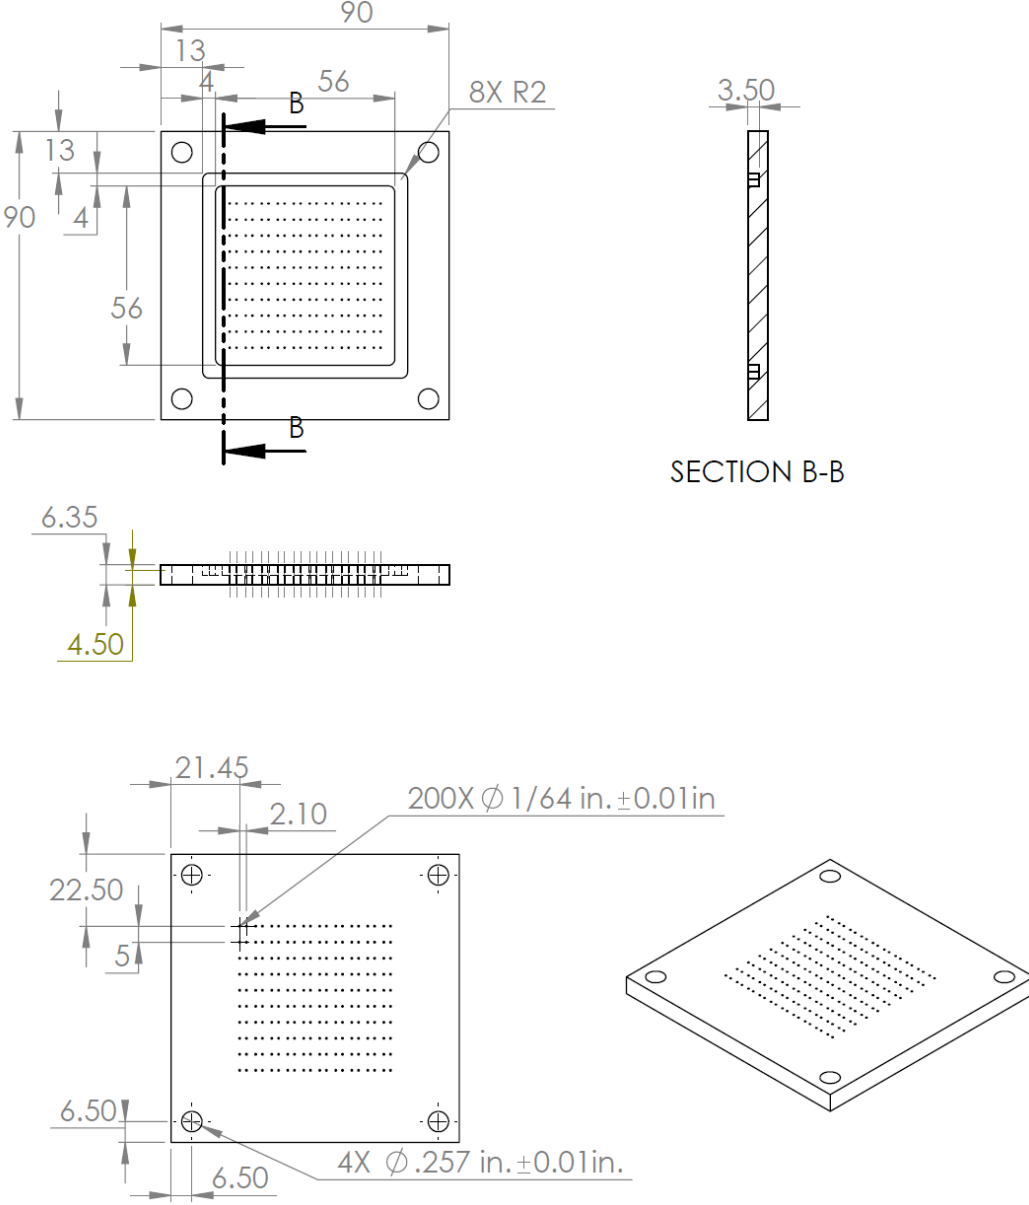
The cutting plate for our prototype design. All dimensions are in mm with tolerances of 0.1 mm unless other specified.
